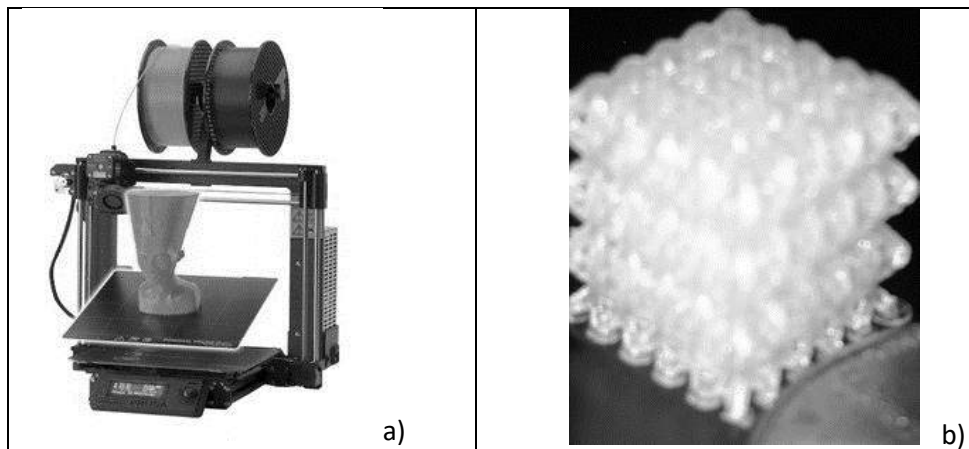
Images showing a) the Prusa MK3 3D Printer and b) 3D printed PLA-HA porous parts for the decayed tooth recovery
